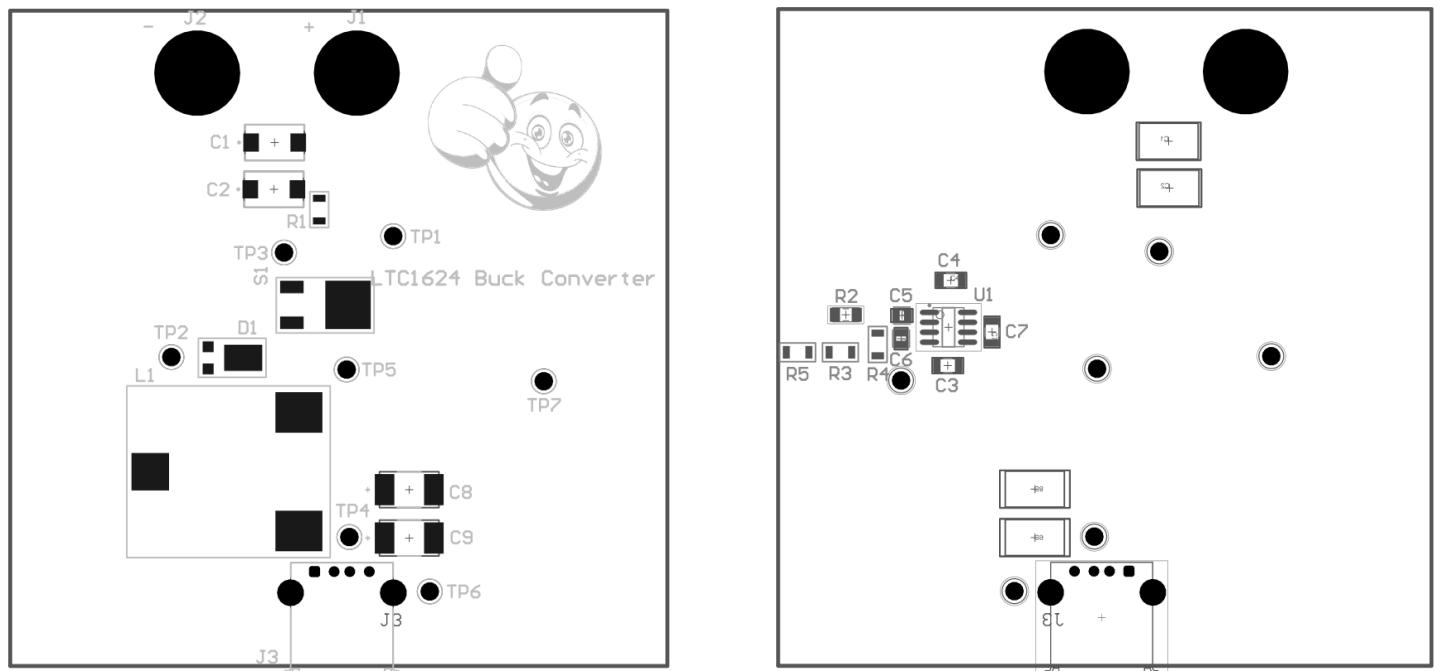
Final PCB. Power Flow Side(left), Controller Side(Right)
